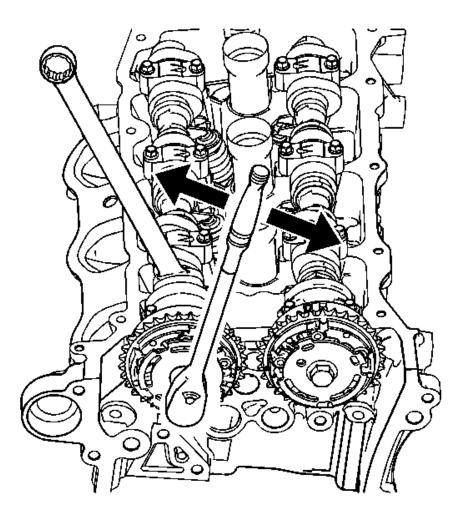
Preventing Camshaft/Engine Rotation Using Open-End Wrench Courtesy of GENERAL MOTORS COMPANY
